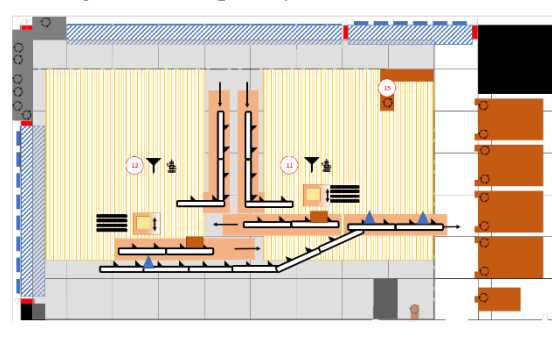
Conceptual layout of design 3a and 3b - First floor
